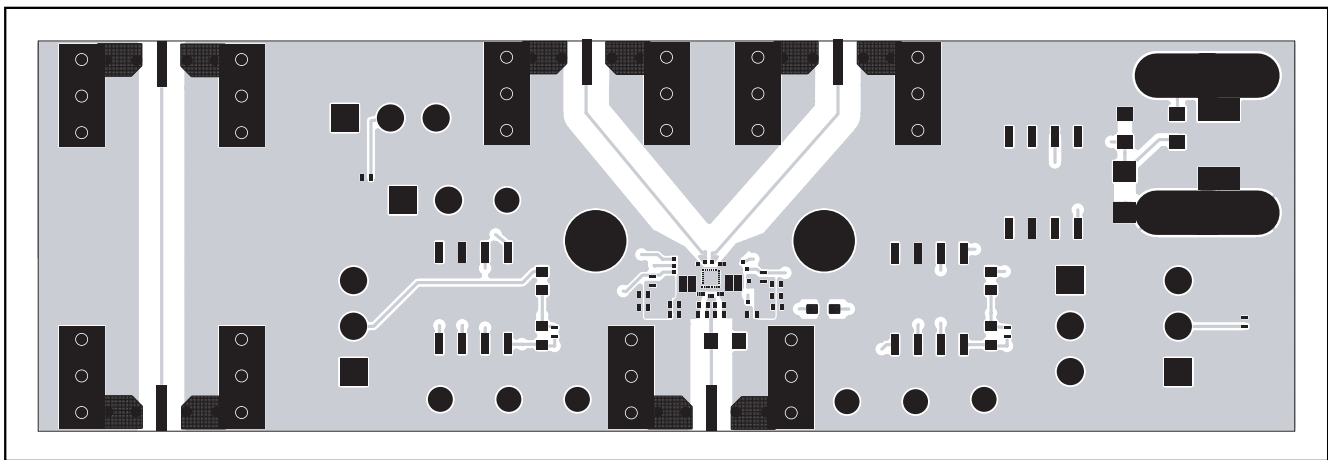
MAX3934 EV Kit PC Board Layout—Component Side
